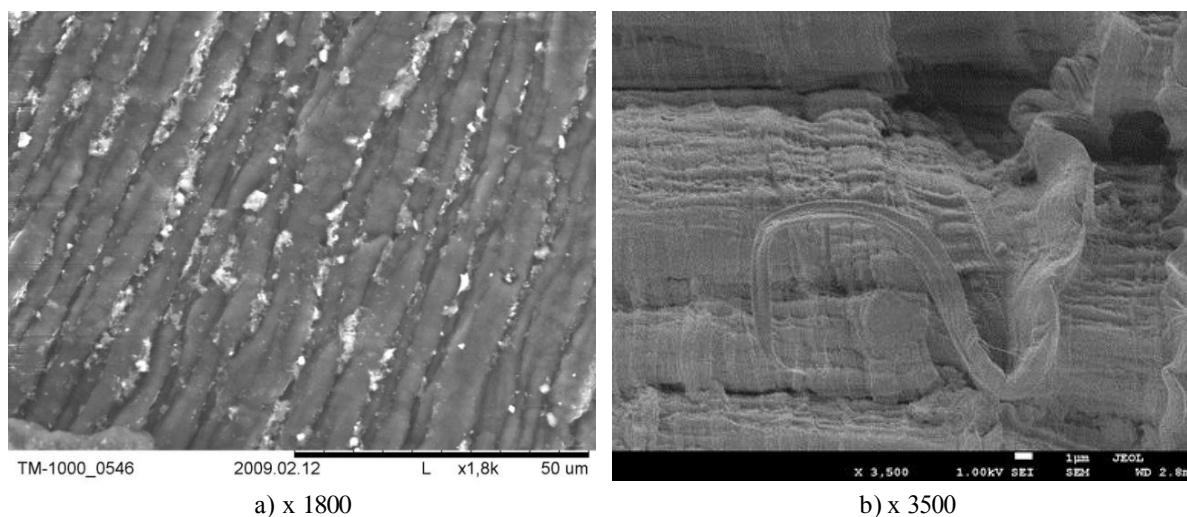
The nature of the fracture surface of specimens after impact test
